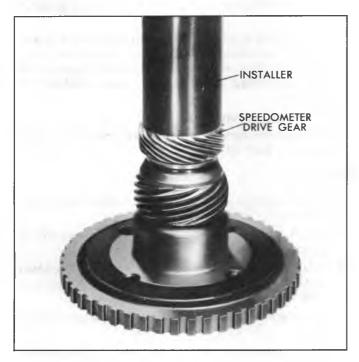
T-B--Installing Steel Speedometer Drive Gear
